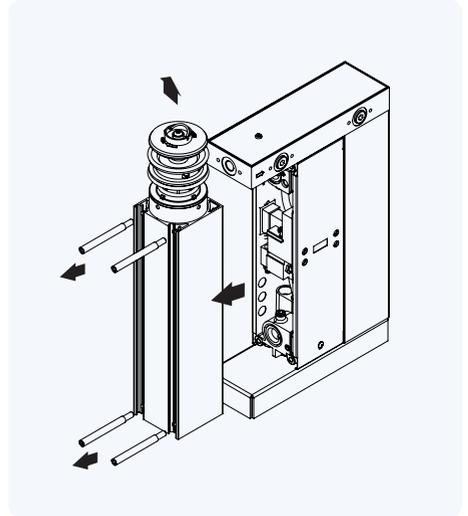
Models 4 SCFM – 35 SCFM with tower assembly removed
